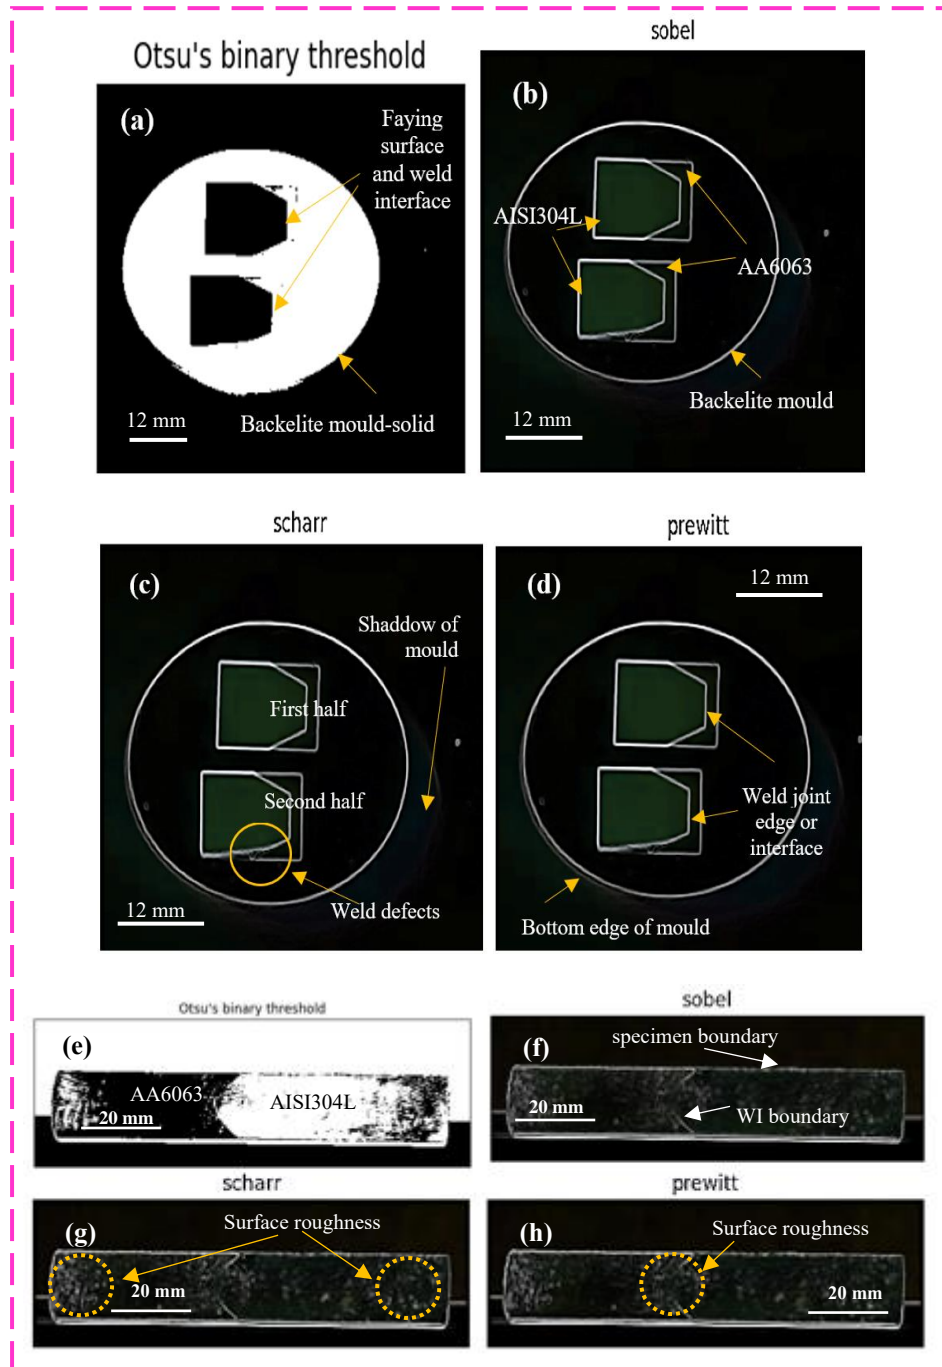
Friction weld joint sample: a, e) Otsu's binary threshold image; b, f) Sobel output; c, g) Scharr output; d, h) Prewitt output (where images e-h are surface roughness identification on weld sample after milling)
